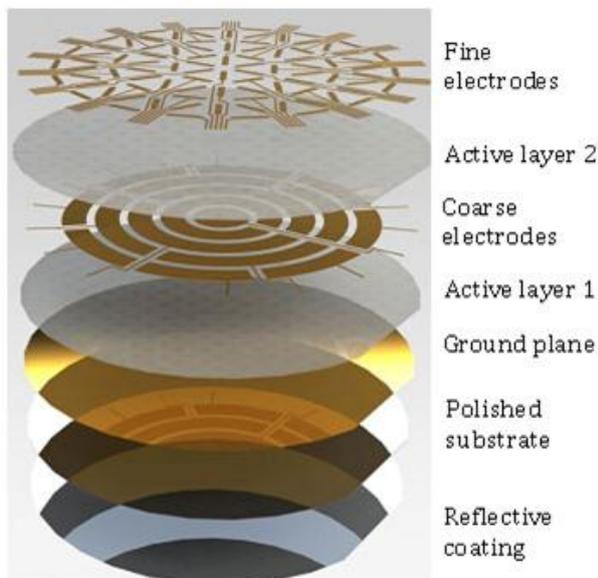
exploded view of a 10cm diameter deformable thin, laminated mirror design
